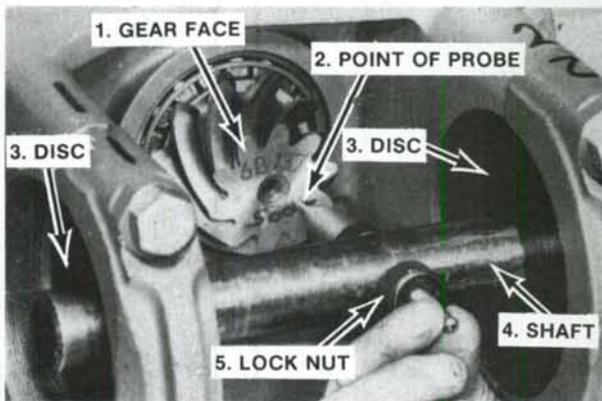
To set pinion shaft protrusion, install special tool set (DB-8208) in carrier housing as shown. Refer to Fig. 13 and to text to determine thickness of shims required to correctly set shaft protrusion.
